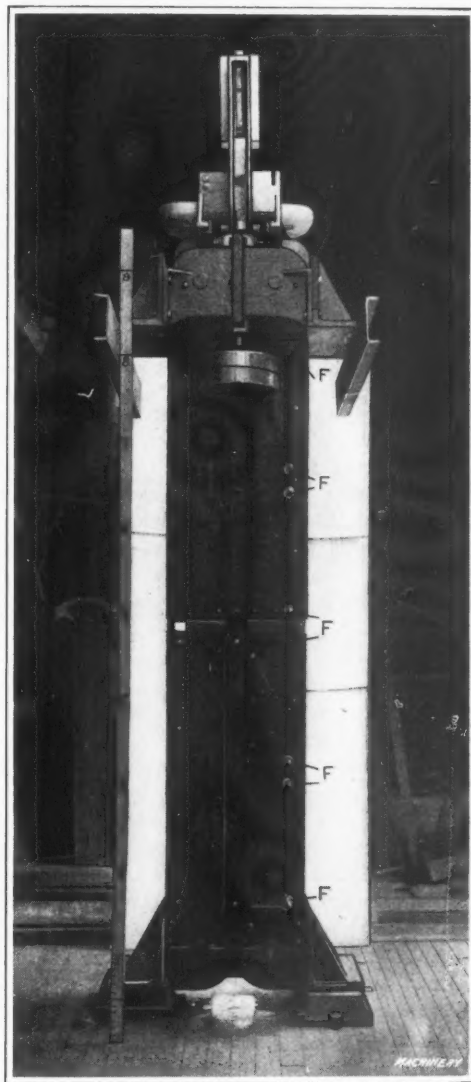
Side View of Machine showing Arrangement of Drive and Means for adjusting Guide Bearings
